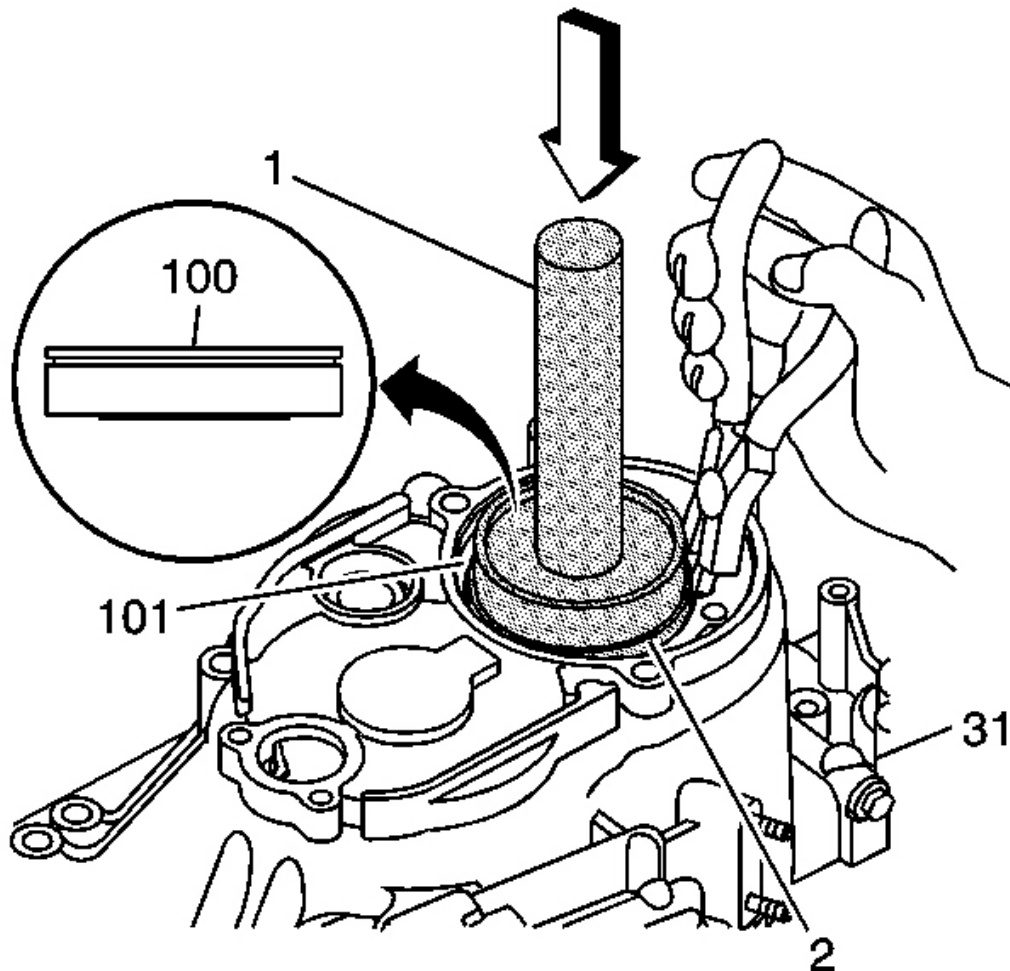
Expanding The Mainshaft Rear Bearing Using Pliers
